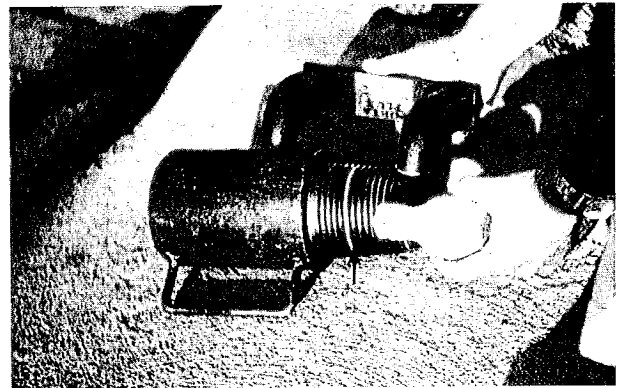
This photo illustrates how tool has disclosed crack in threads on oil tool joint.
